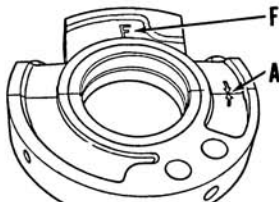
Intermediate main bearing housings should be assembled so arrows (A) are pointing towards each other. Install housing in cylinder block with (F) mark facing front of engine.
